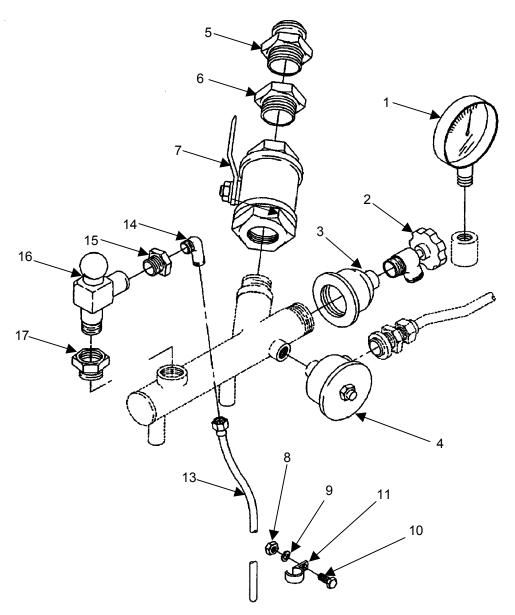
Upper (M80) Manifold Assembly (Sheet 1 of 3)
